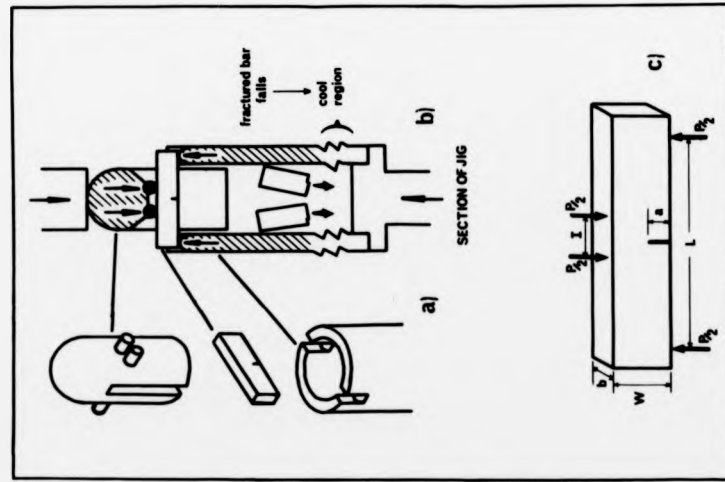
(a) Construction of K_{IC} Jig. (b) Sectional view of assembled Jig. (c) Dimensions of K_{IC} specimen.
